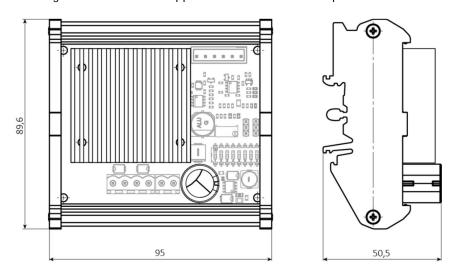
Dimensions of stepper motor driver SMD-2.8 carrier kit version
